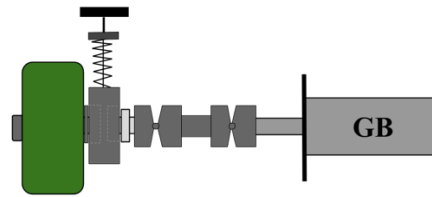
Conceptual drawing of the third suspension design. The gearbox is connected to the wheel shaft through the telescopic joint. The suspension knuckle is secured axially by a washer and the wheel shaft.
